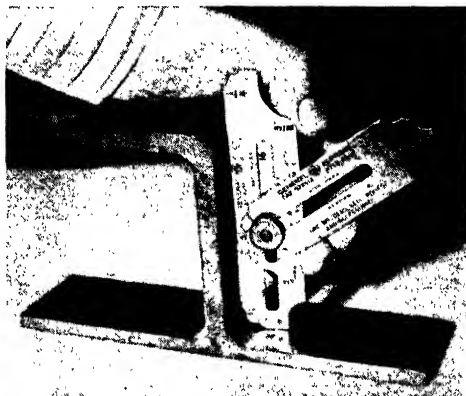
A gauge of this type gives the inspector and welding operator a means of accurately measuring the size of fillet welds, which is the first step toward standardization, as well as elimination of the curse of overwelding. (Courtesy of R. G. LeTourneau, Inc.)
